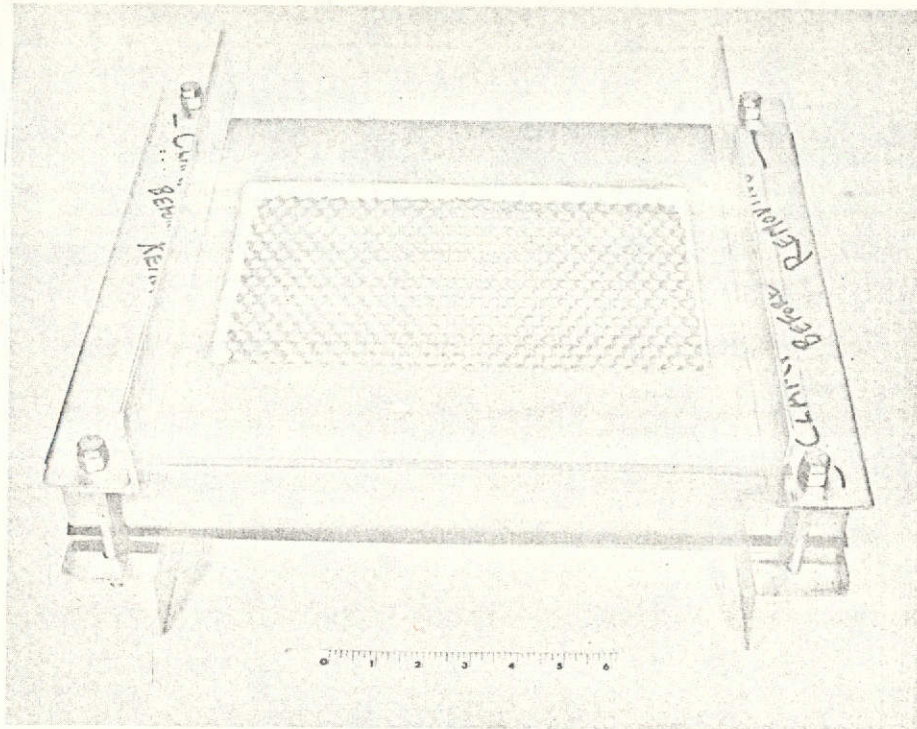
TOP SURFACE, VENTING PRESSURE TEST FIXTURE
